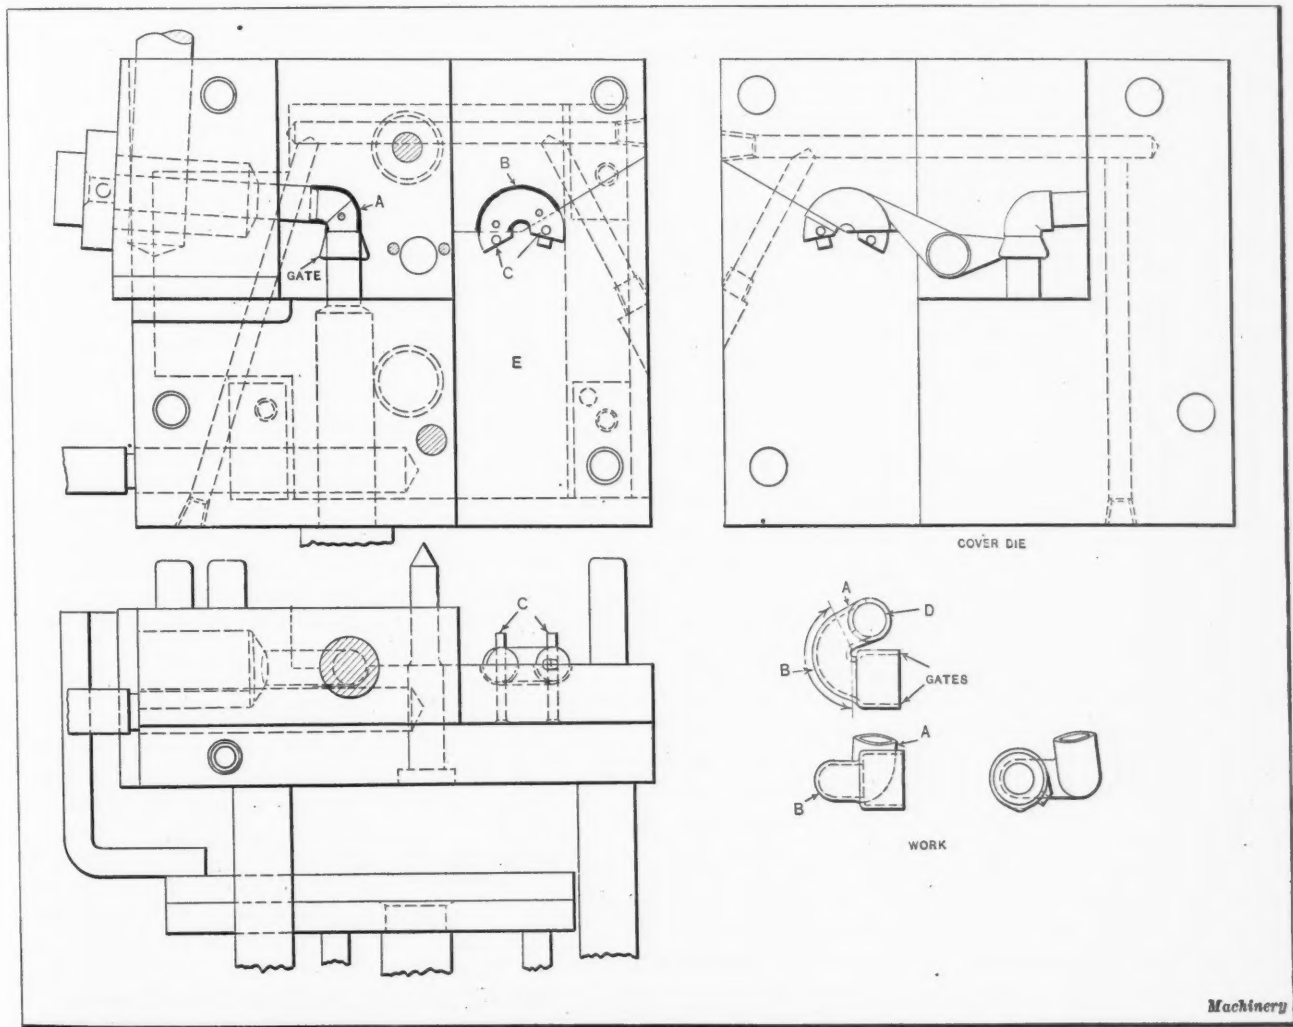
Two-impression Dies for making Two Castings. This is the First Casting Operation for producing the Tone-arm shown in the Lower Right-hand Corner
